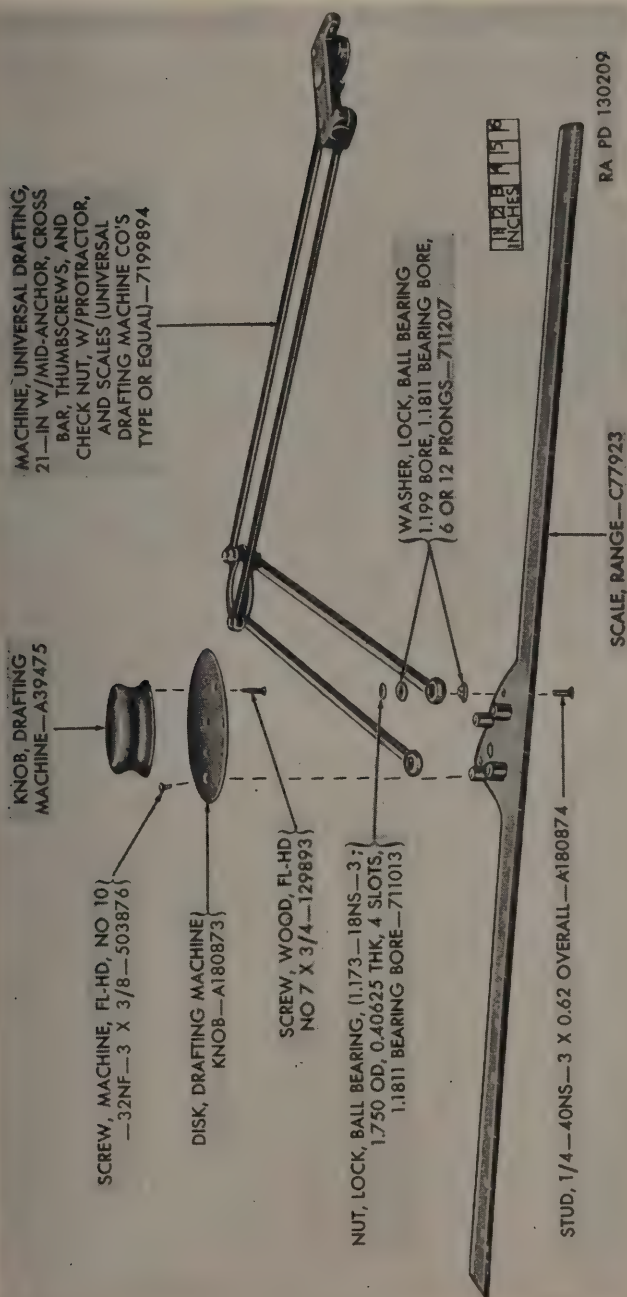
Components of the drafting machine—plotting boards M5 and M5A2 (M5 shown).
